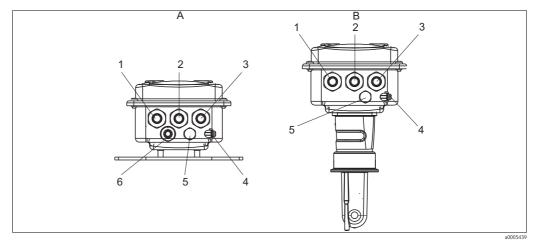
Terminal assignments of cable glands on Smartec S CLD134
